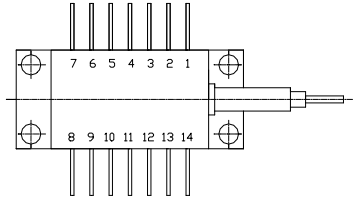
14 pins butterfly modules Outline dimensions diagram.
